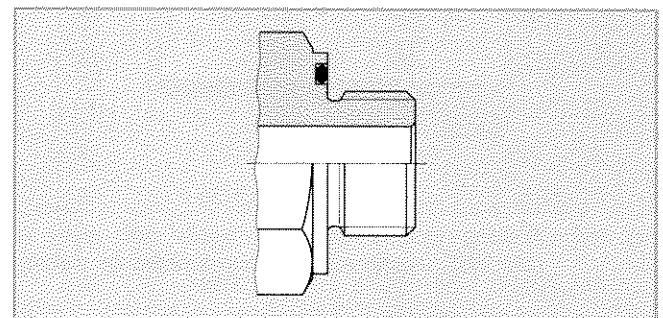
O-ring, female port to DIN 3852 wide, elastic seal, undercut larger than cutting edge, high tensile force on thread
